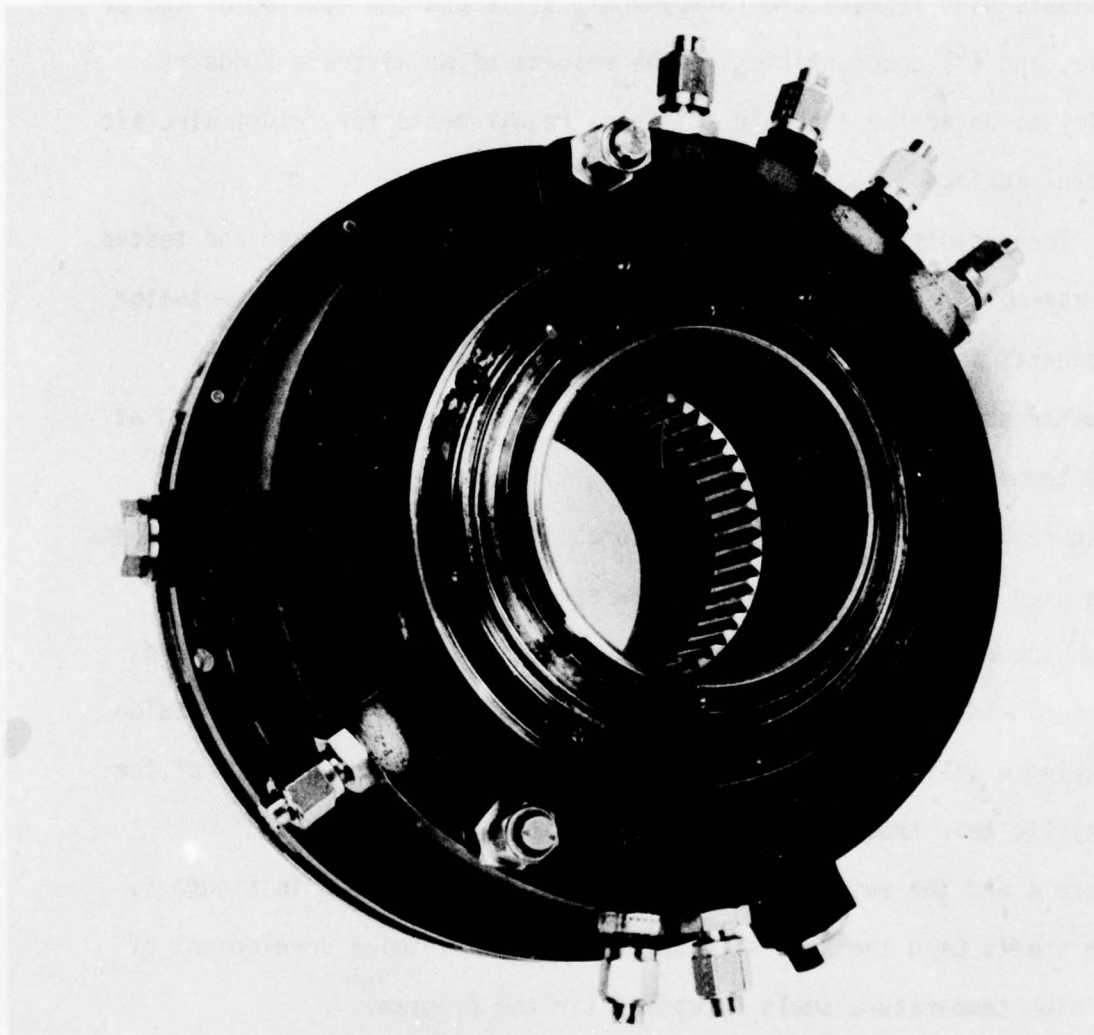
Prototype High Temperature Rotary Actuator Assembly Model HL-043-U1
